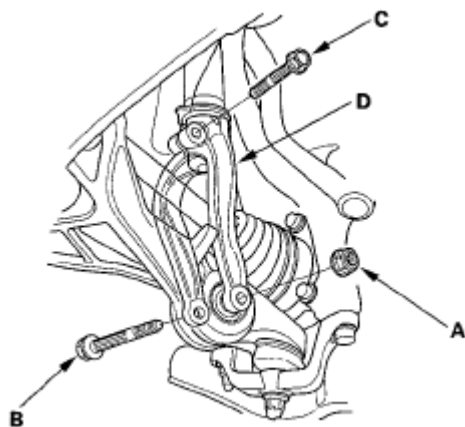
Identifying Self-Locking Nut, Flange Bolt, Pinch Bolt And Damper Fork
